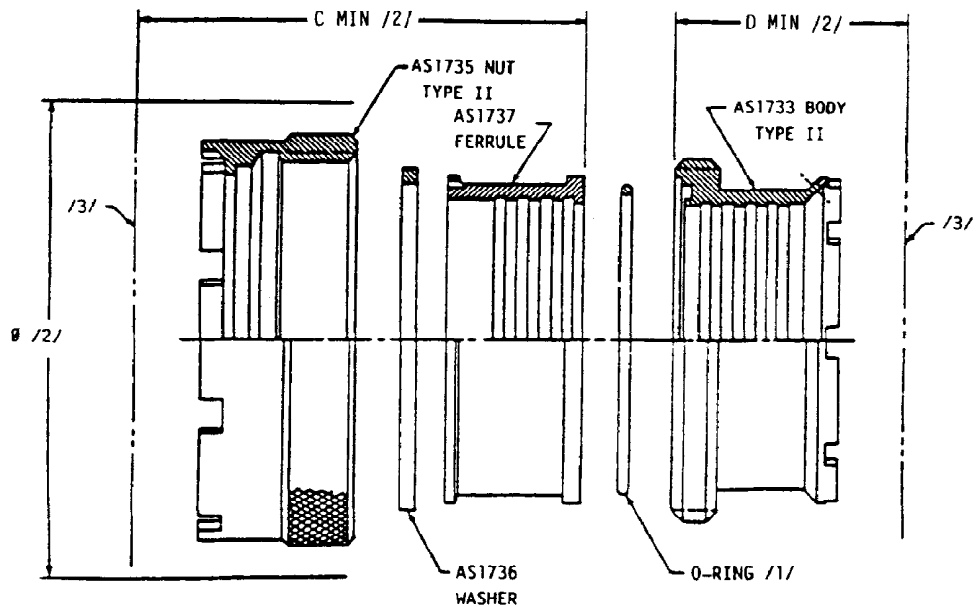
TYPE II COUPLING - EXPLODED VIEW
